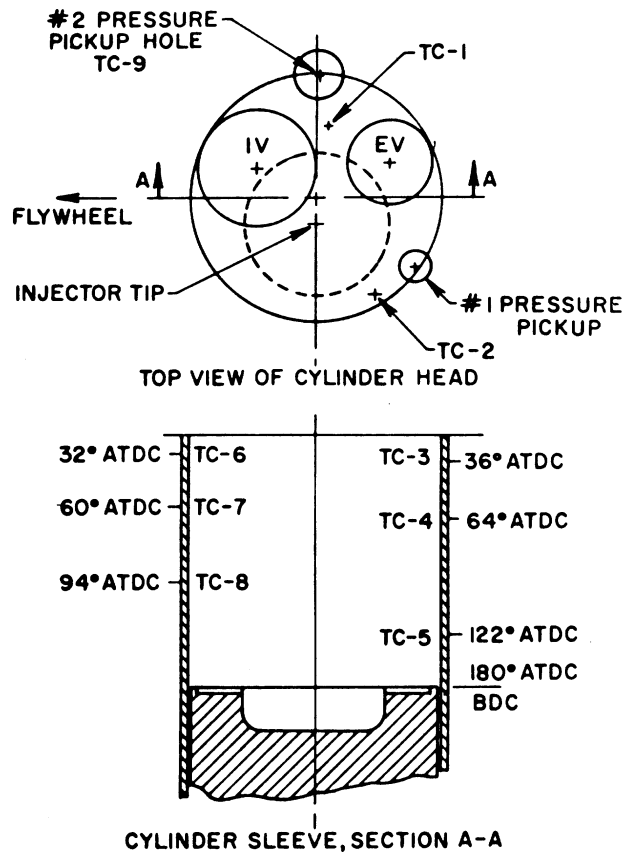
Cylinder head and sleeve geometry showing thermocouple locations
